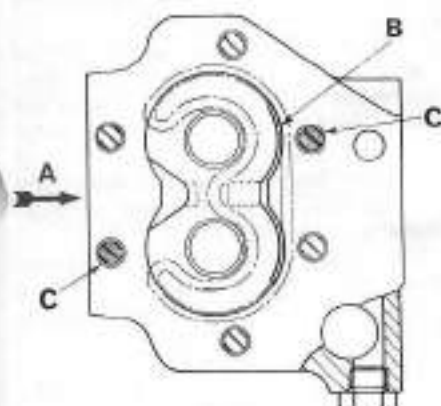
Cross-sectional view of Plessey hydraulic pump; refer to Fig. 293 for exploded view.
